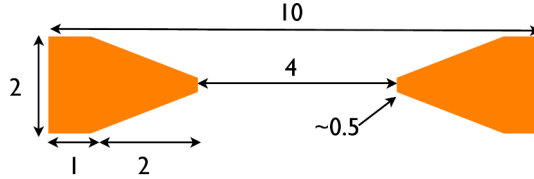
New ring (ring 2) cross section and dimensions (in mm).
